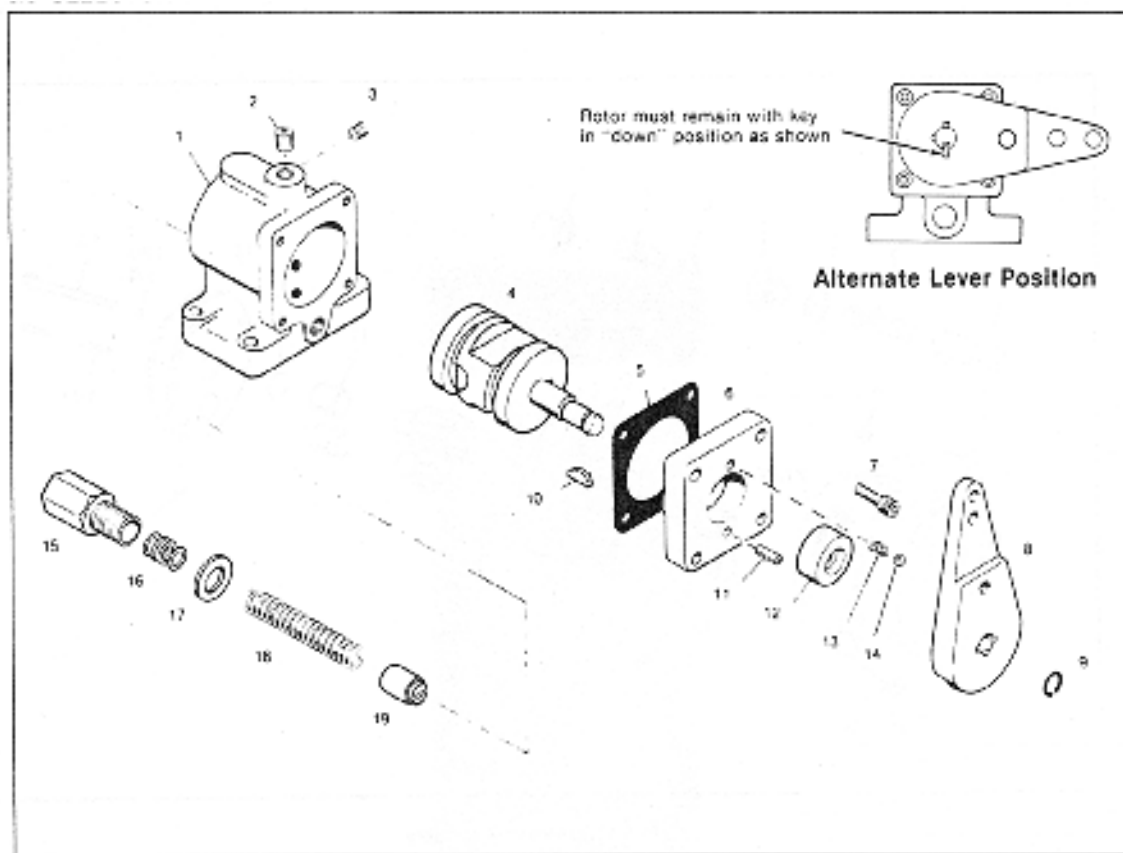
Selector Valve Assembly, no. 1-09427-2000
